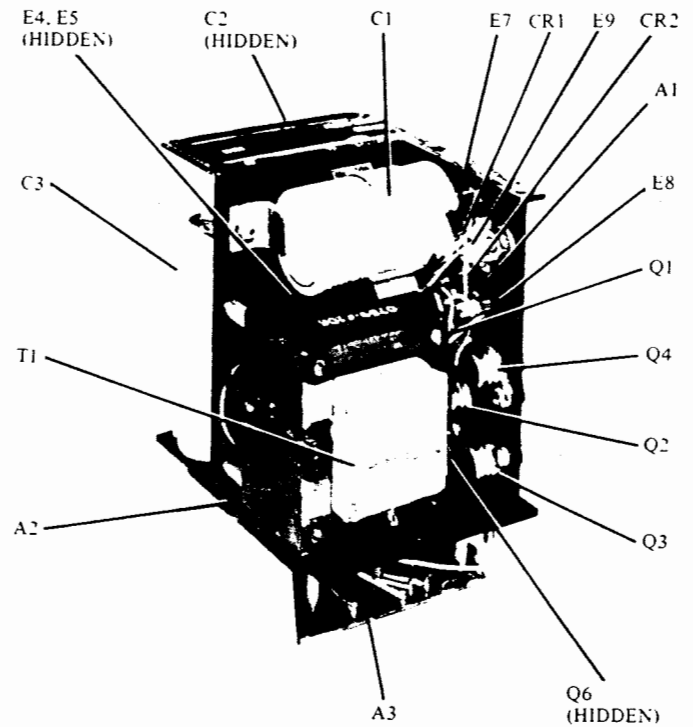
Power Supply A2A11 Component Locations - Transformer Side of Chassis
